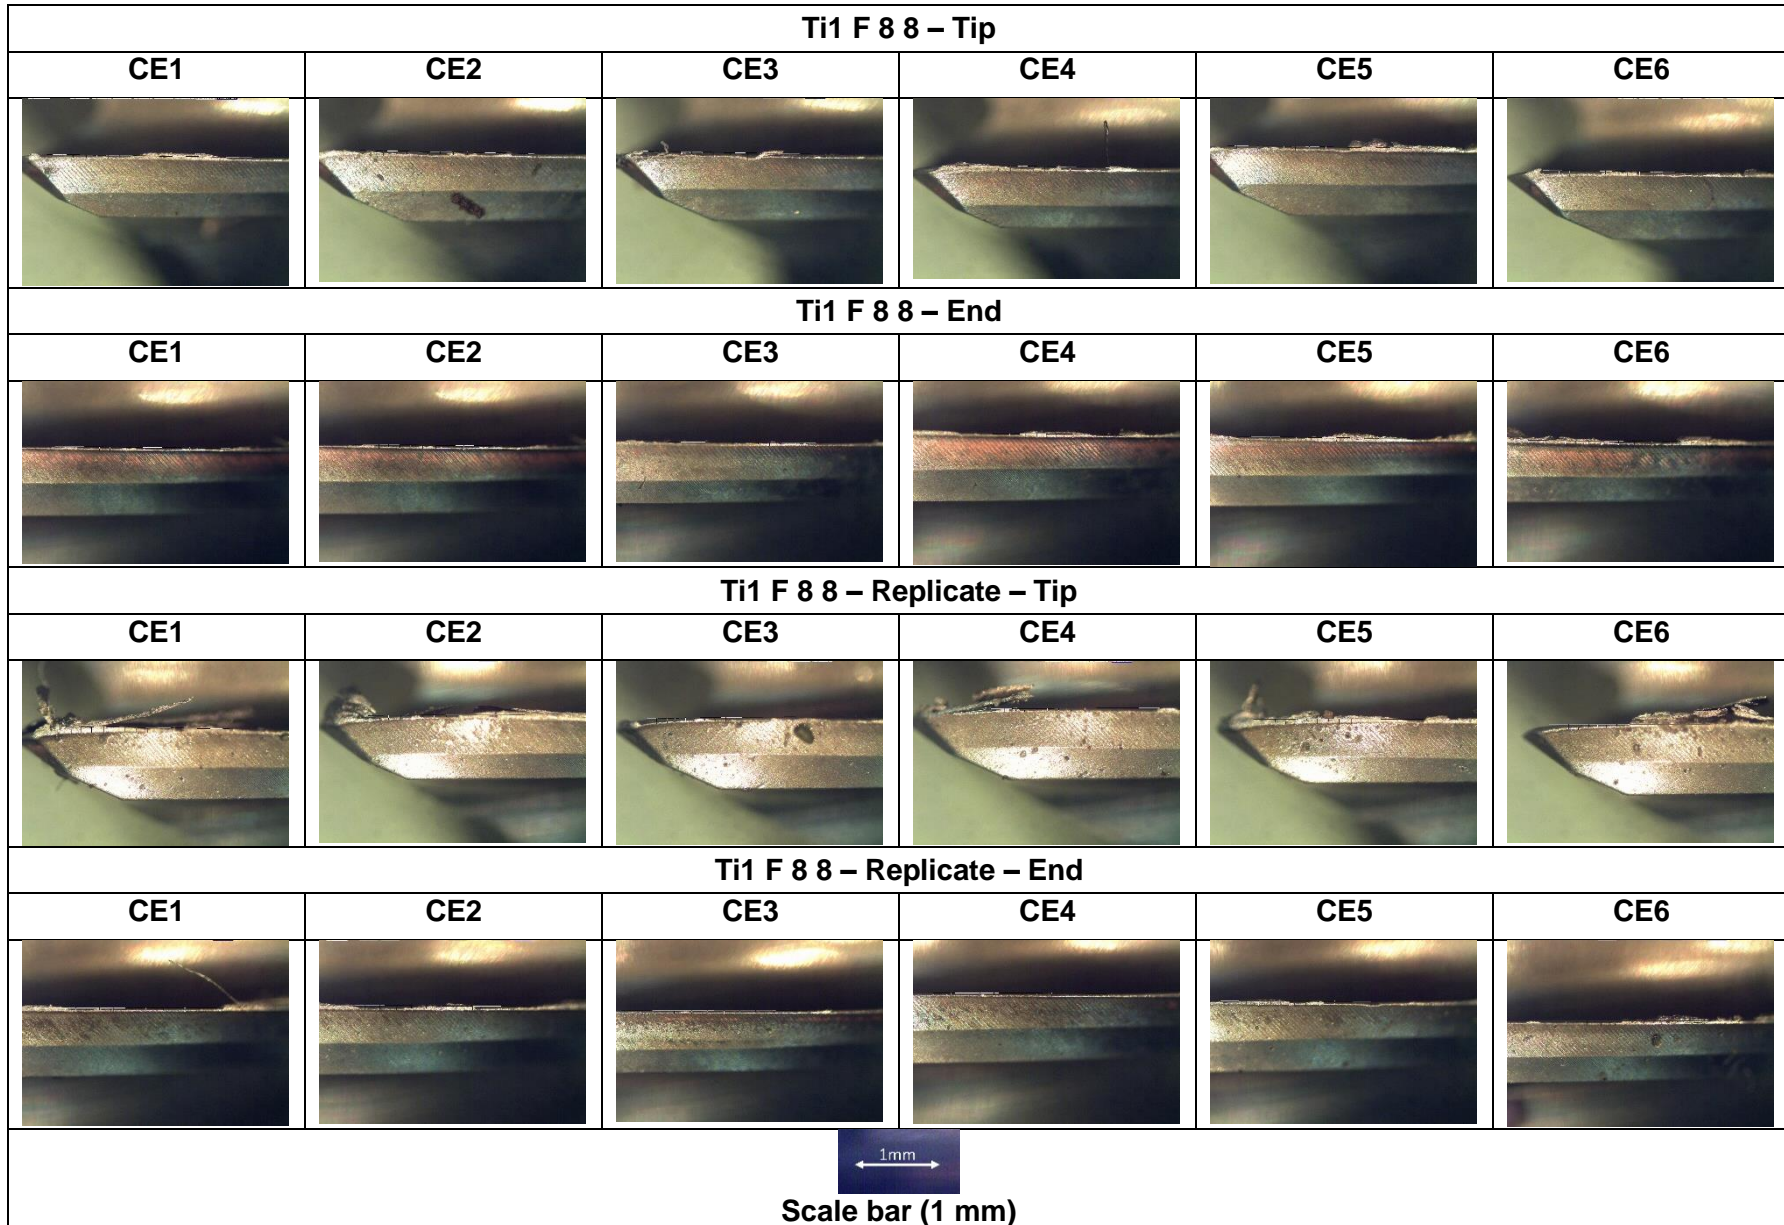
Example of BUE in end-milling of Ti-6Al-4V using 6-flute end-mill
